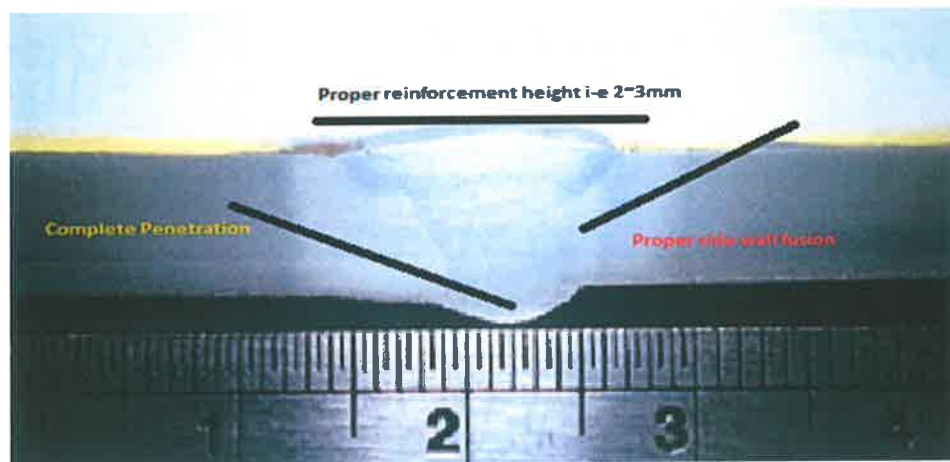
Macrograph Examination of final weld (GTAW)
